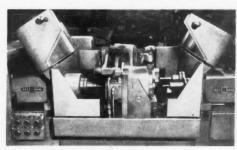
The set-up for fine boring three holes in the inner transmission housing
